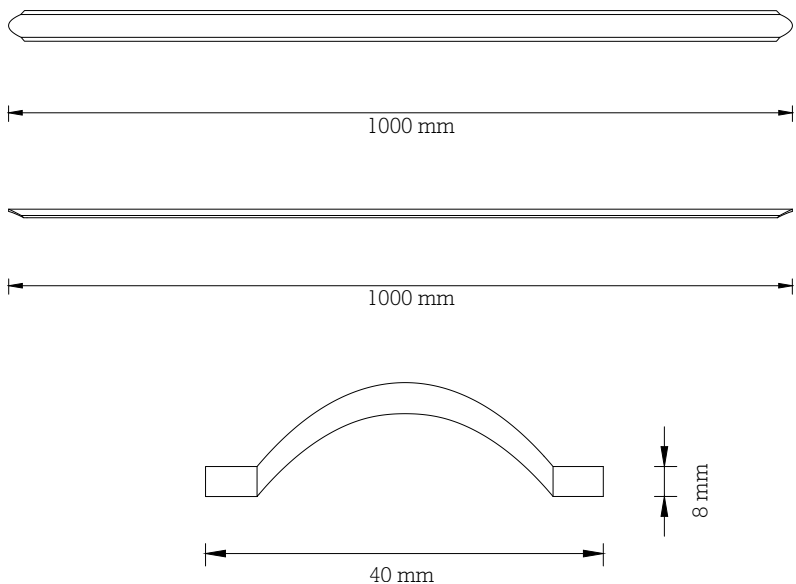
Construction detail - Structural load-bearing element | Dimensioned elevations.
